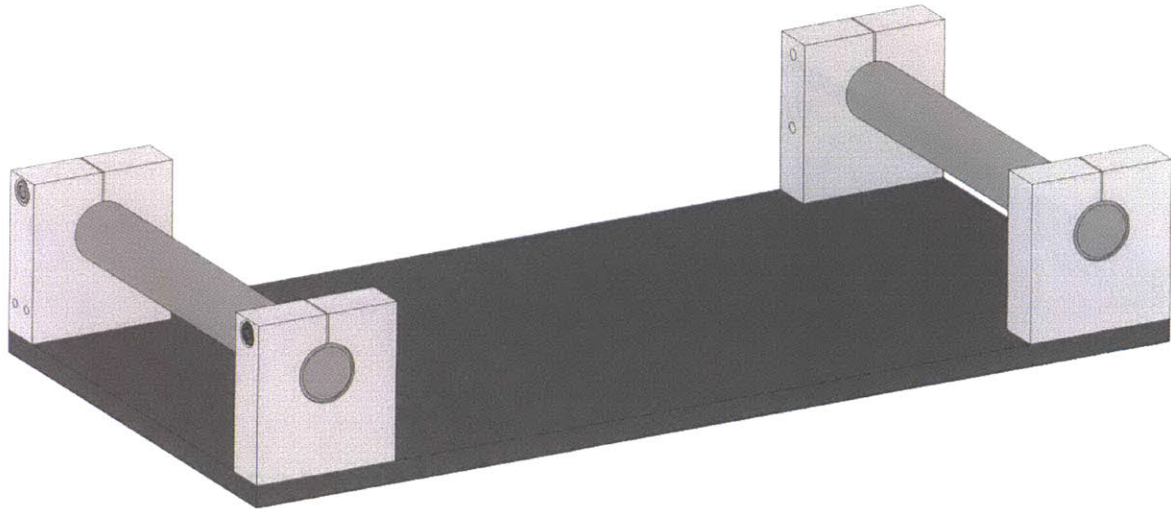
Print head construction: Two parallel 1" diameter stainless steel guide rod shafts were mounted off of a 3/8" thick precision ground aluminum baseplate.
